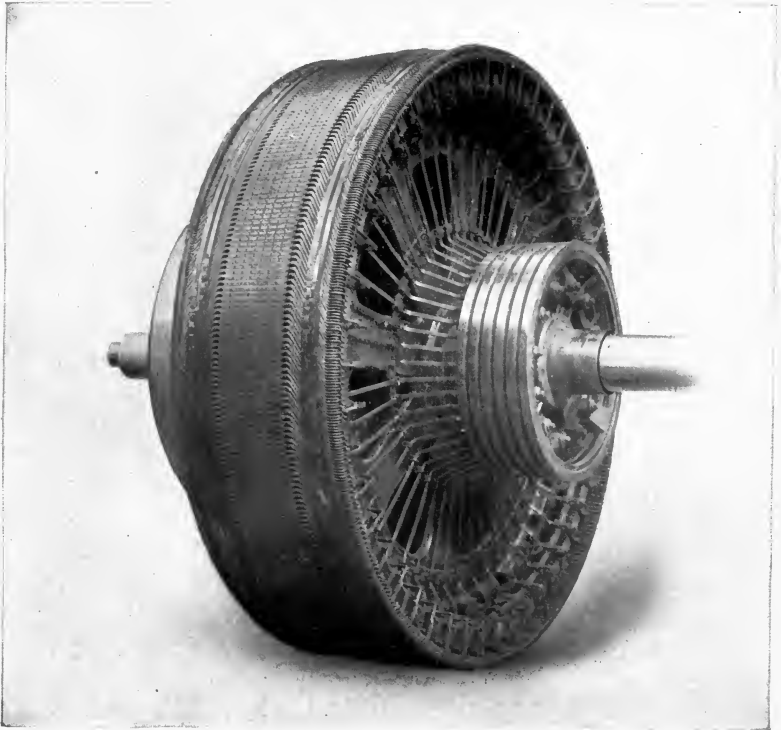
A.C. Collector-Rings on Rotary Converter.
